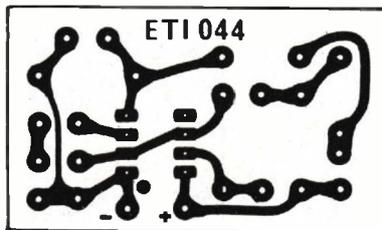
Printed-circuit board layout (copper side). Full size of this board is 50mm x 30mm.
